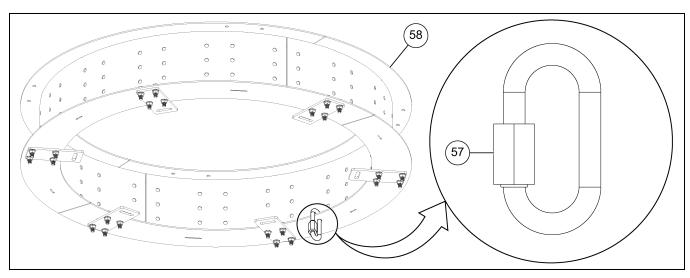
S Supplier Quick Link on the Center Collar (View from Bottom Side of the Center Collar)
